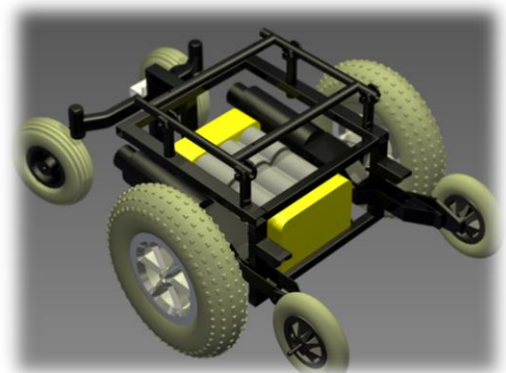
3D Drawing of Apollo II's Drive Chassis
